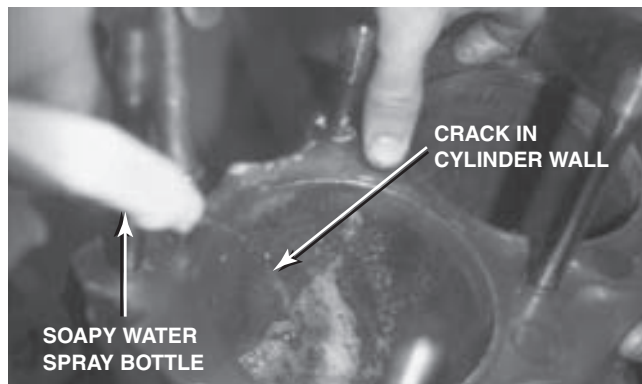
To make sure that the mark observed in the cylinder wall was a crack, compressed air was forced into the water jacket while soapy water was sprayed on the cylinder wall. Bubbles confirmed that the mark was indeed a crack.
